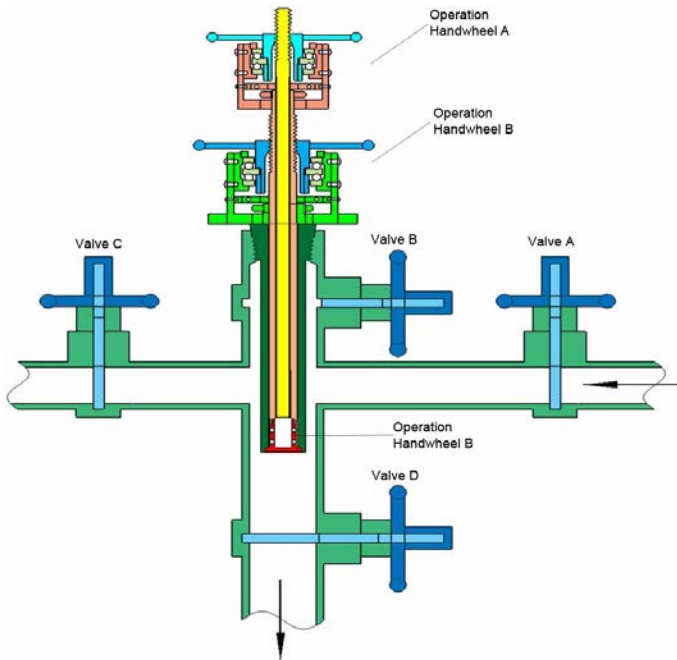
Installation of the crushing injection equipment at the well head of an injector:
